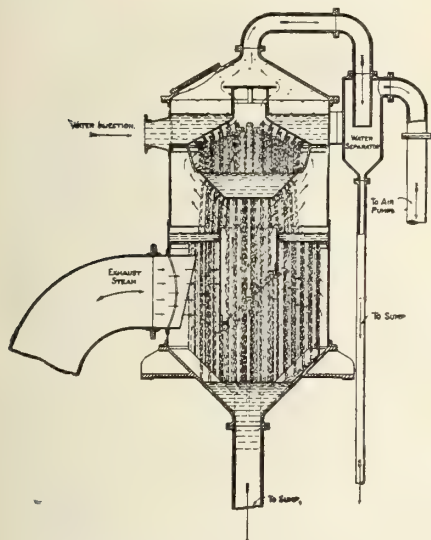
TYPICAL BAROMETRIC JET PLANT.
